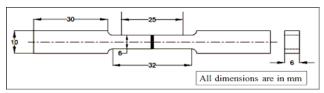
ASTM standard tensile test specimen dimensions for plastic and fibres,
